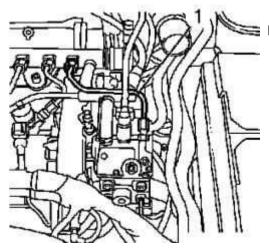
Removing the high pressure pipeline: 1 - Pipeline
